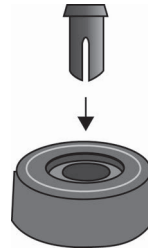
Inserting the Rivet Housing into the Bumper Foot
